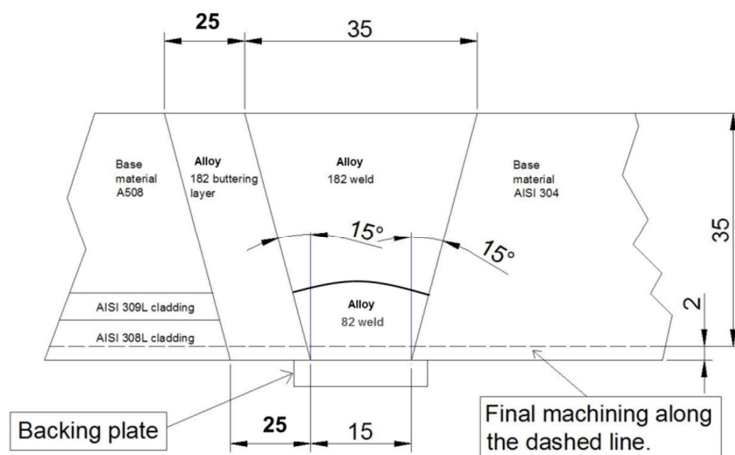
Technical drawing showing the dimensions and materials of the BWR-DMW mock-up.
